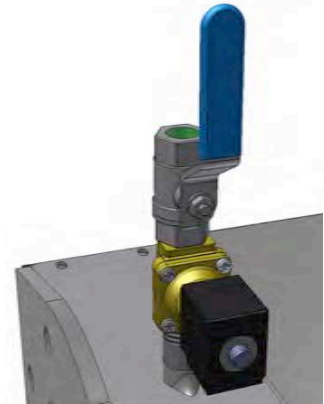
(above right). Solenoid & ball valve mounted on flushing connection of wash press; alternate placements are also acceptable – please ensure that the ball valves can be opened and closed without obstruction & that the removable cover of the wash press and its quick-release clips are not obstructed.
